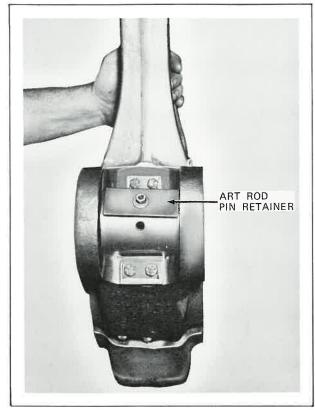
X-82. ART ROD PIN RETAINER, PART 147X1474.
